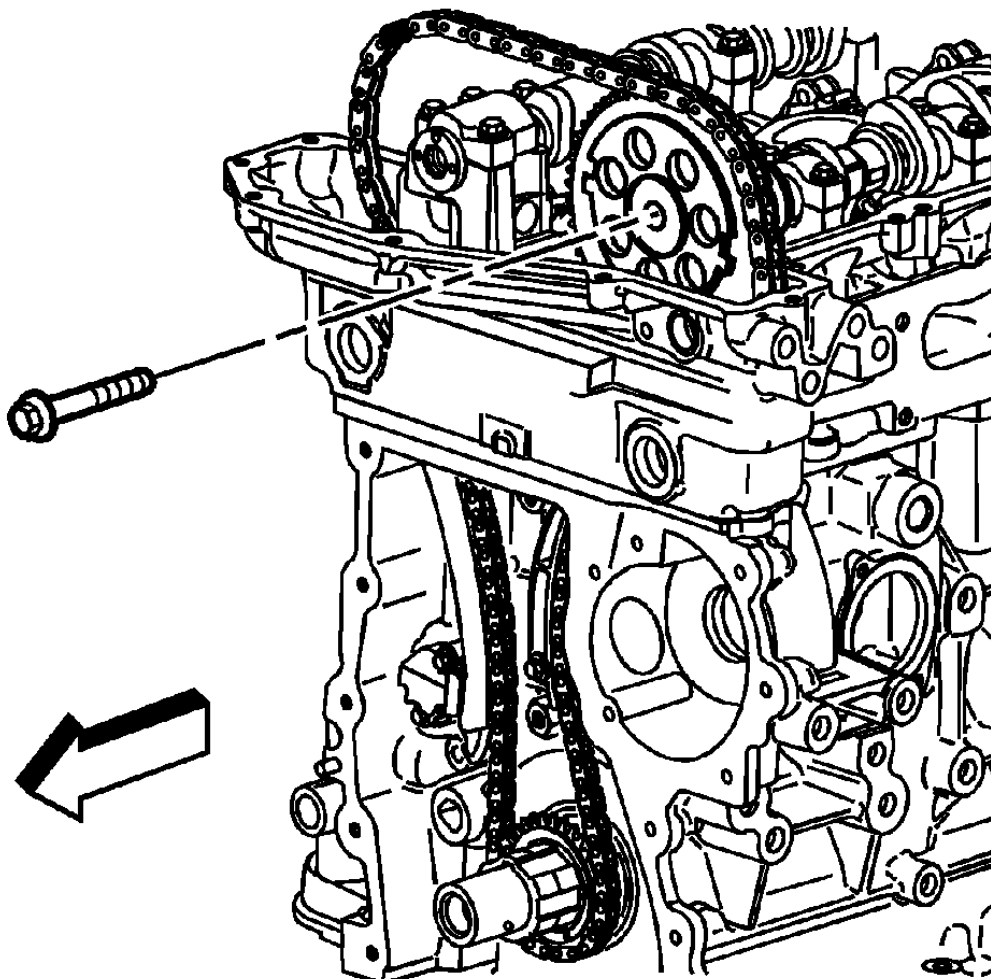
View Of Intake Camshaft Sprocket Washer & Bolt
